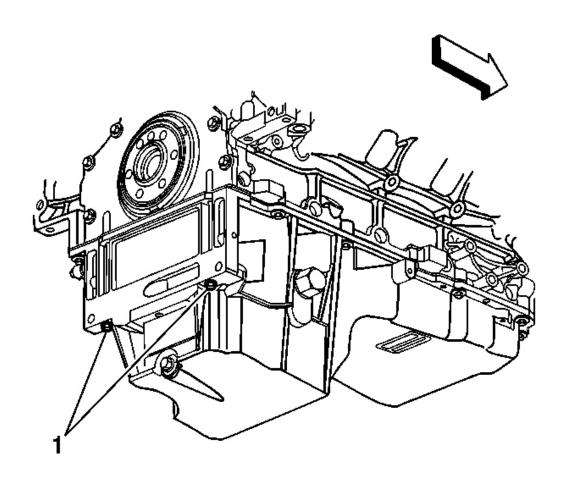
View Of Oil Pan-To-Rear Cover Bolts
